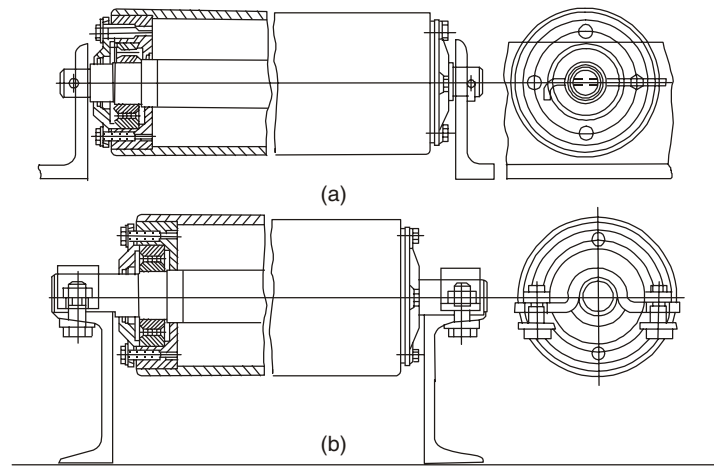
Rollers of (a) heavy and (b) extra heavy type
